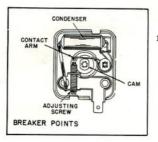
BREAKER POINTS ASSEMBLY 735923
